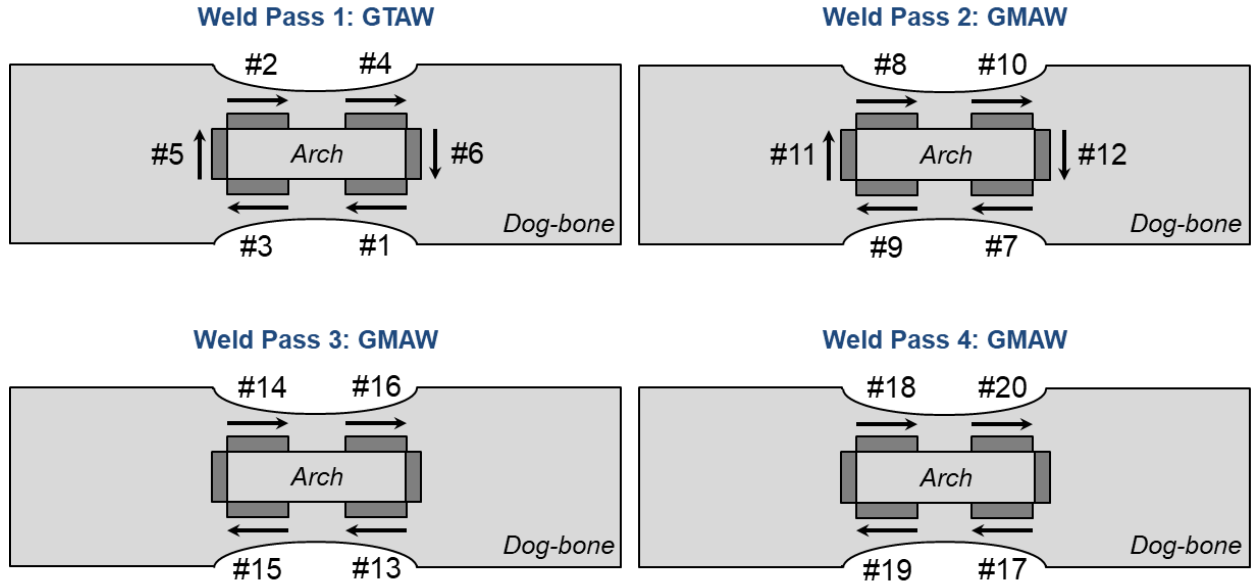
Schematic of the welding direction and sequence for each welding pass, including the initial GTAW beads (6), the first cover GMAW beads (6), the second cover GMAW beads (4), and the third cover GMAW beads (4).
